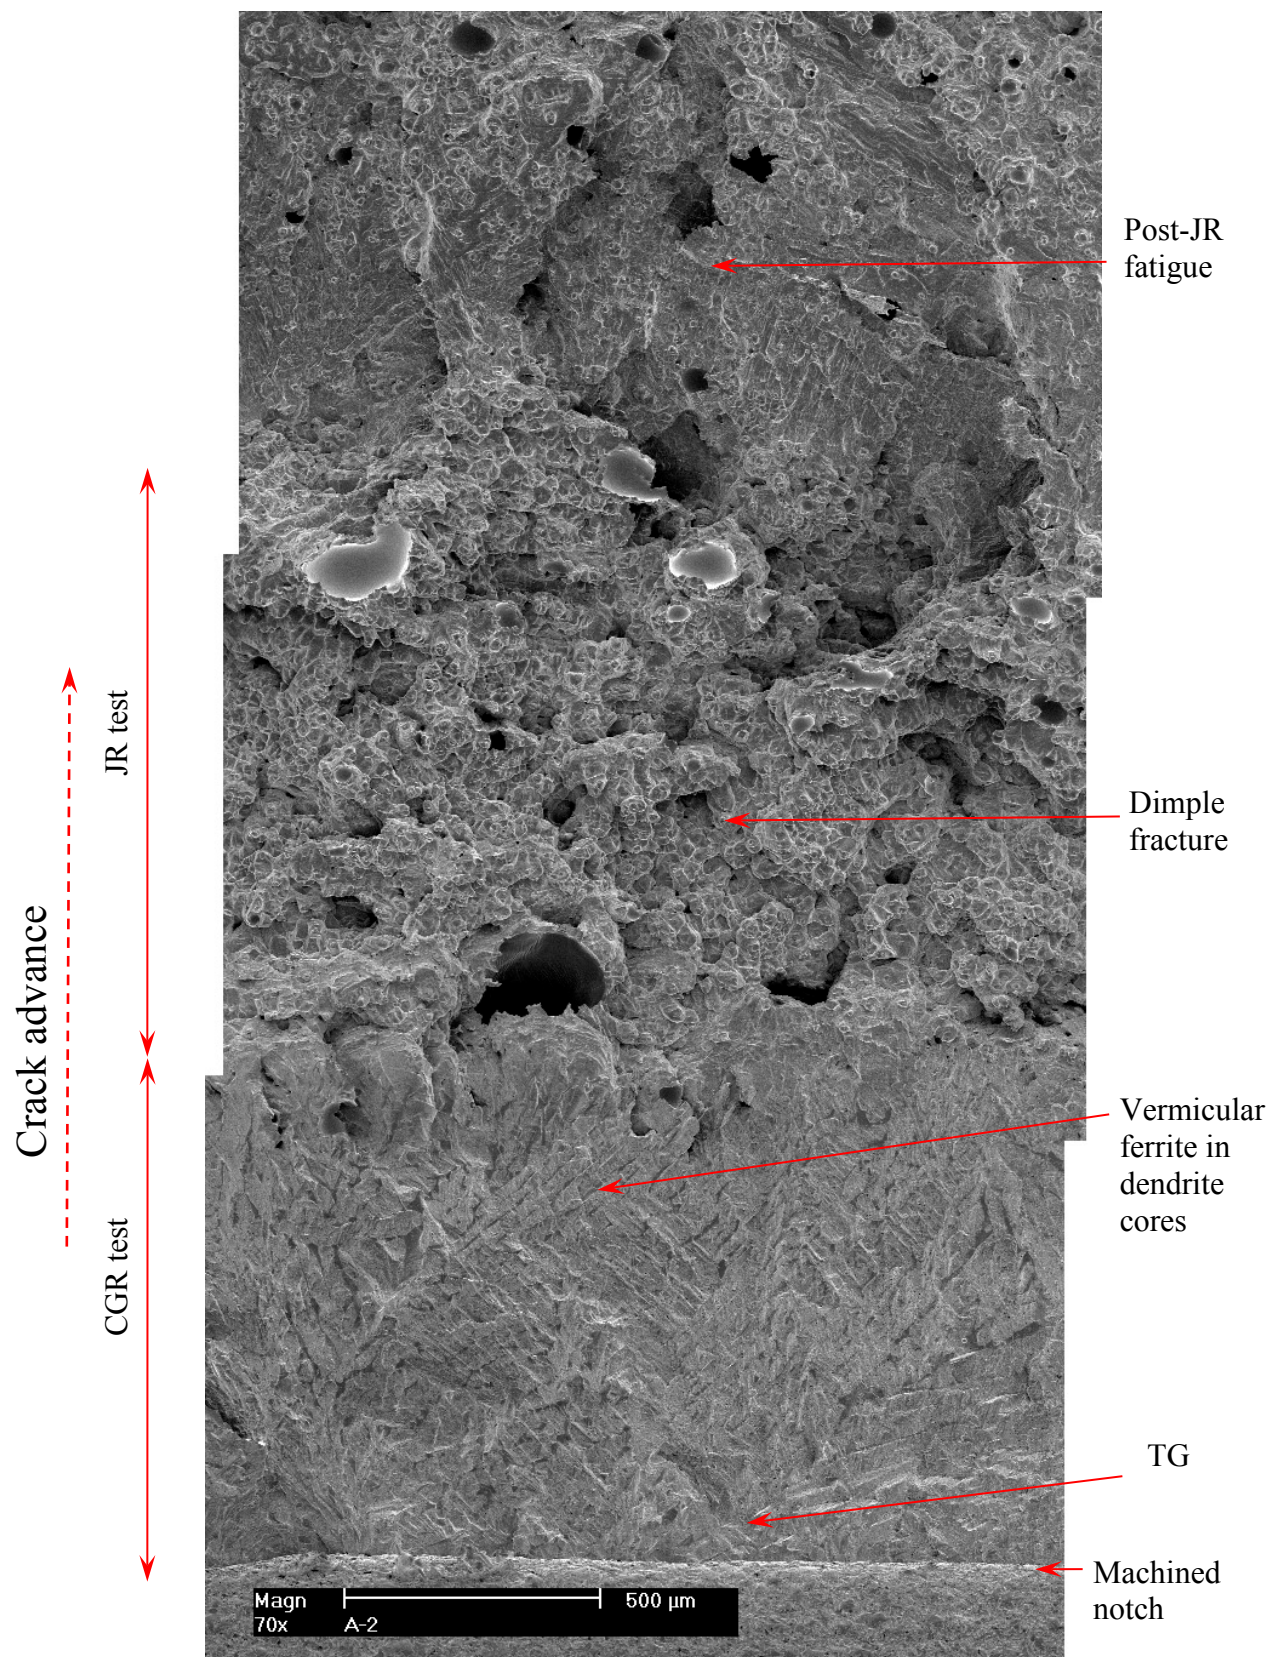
Fracture surface of specimen A-2 along the sample central line.
